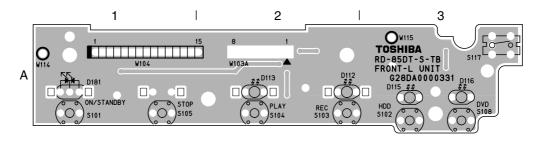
EU03B Front (L) PC Board (Top side)
